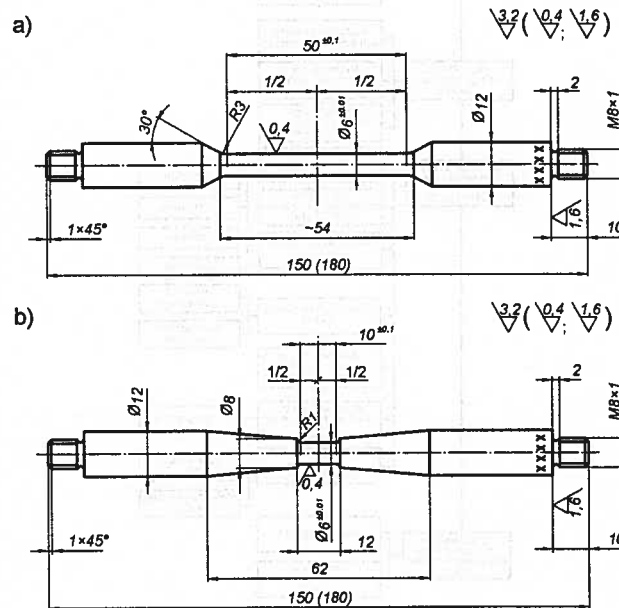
Shape and dimensions of samples used for hot torsion tests: $L = 50$ mm (a), $L = 10$ mm (b) [7]
